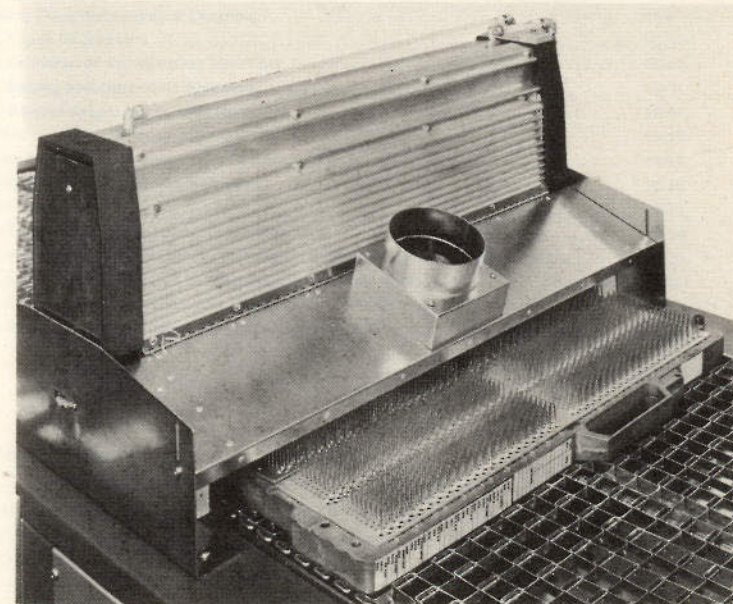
Stainless-steel screen used to prevent excessive heating of the area surrounding a solder joint during infrared soldering (Research Inc.).
